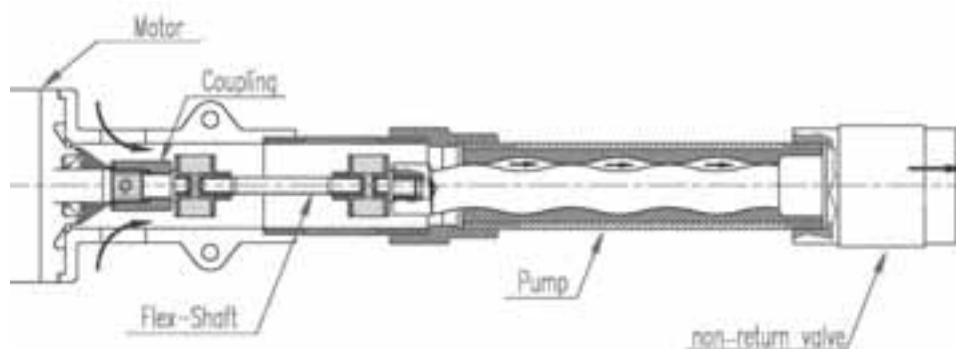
Cross-section of typical helical rotor pump end (Foster et al, 2009).
